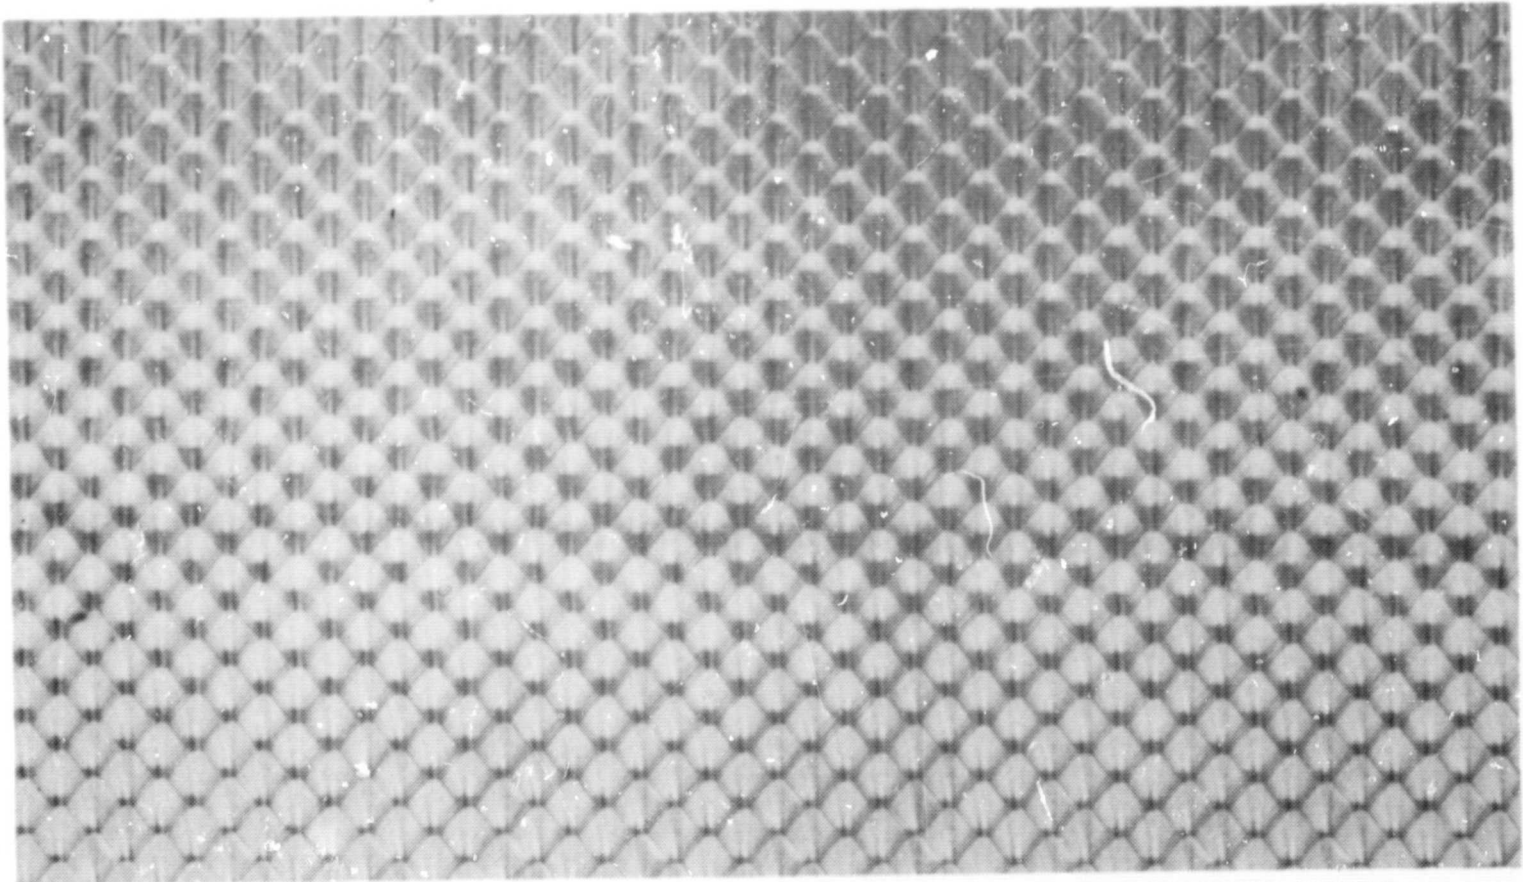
Typical x-ray view of honeycomb panel L9000002-1003 - top surface.
